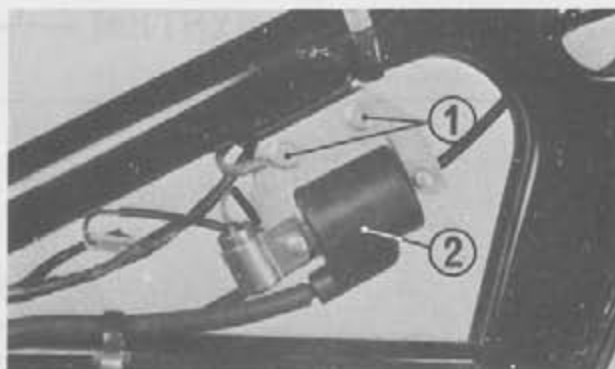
(1) 6 mm bolts (2) Ignition coil
